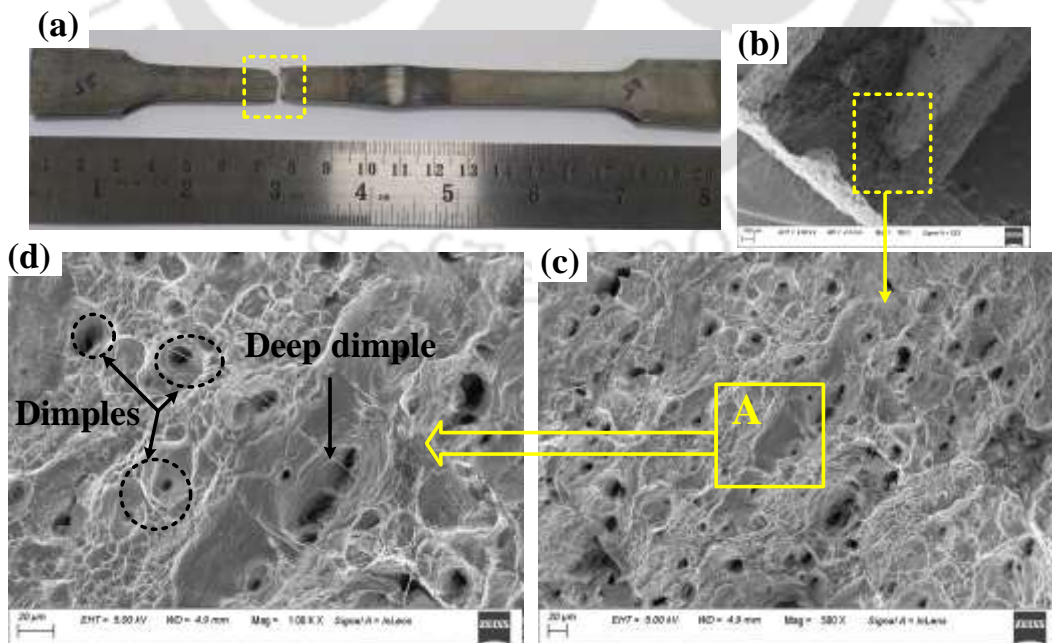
A fractured cross-sectional view of a tensile specimen of welded sample Weld 3.
